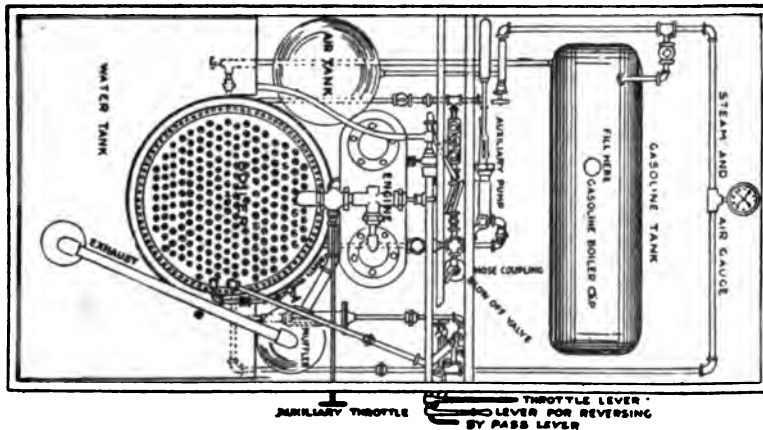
Plan Arrangement of the "Locomobile" Steam Carriage, showing position of the parts indicated in Fig. 246.
